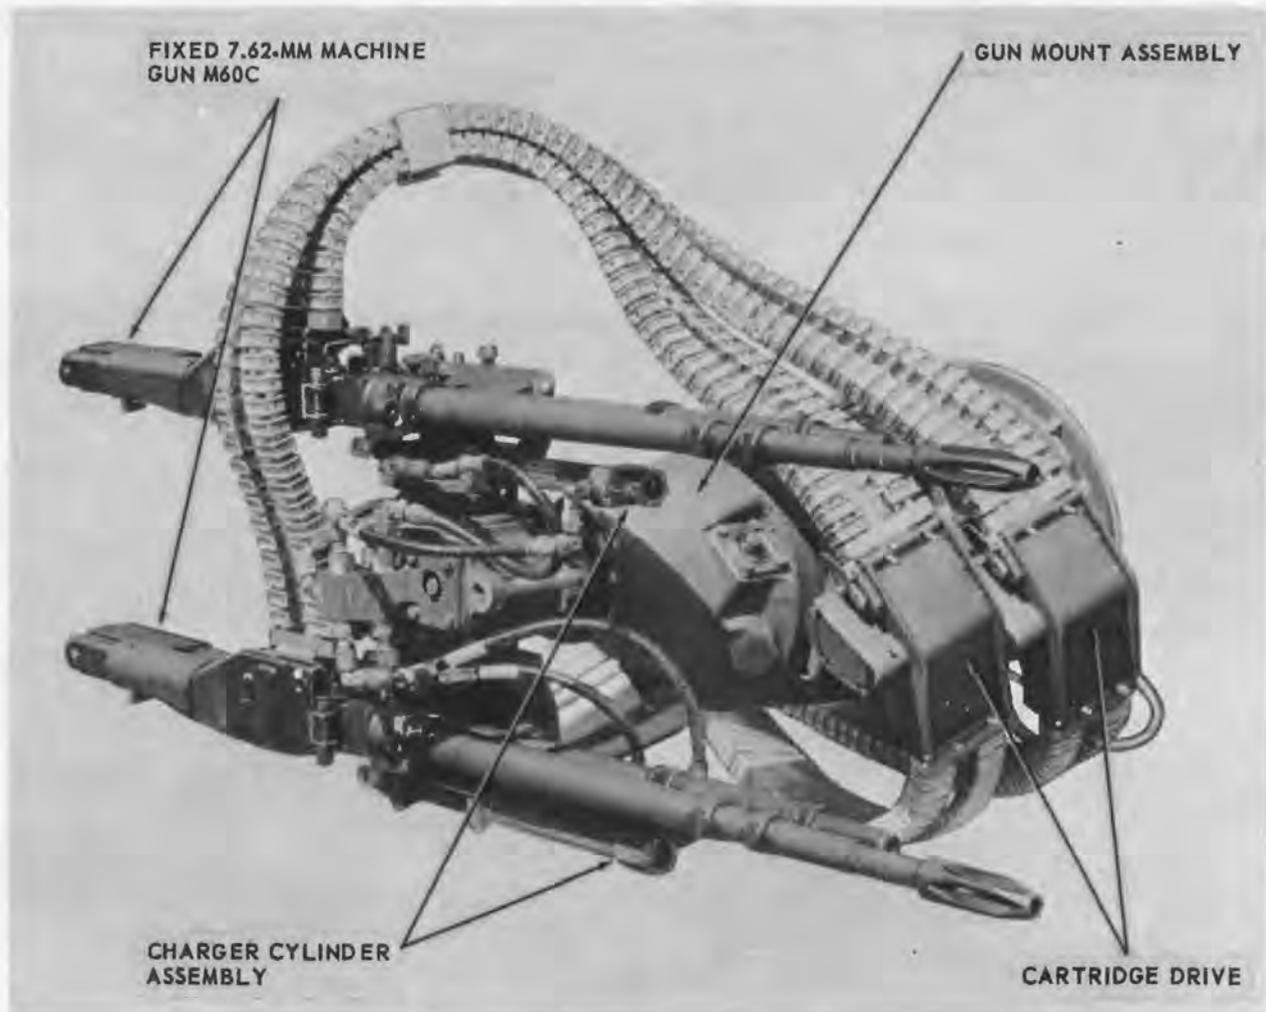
XM6E3 Machine gun — quad machine gun and mount
